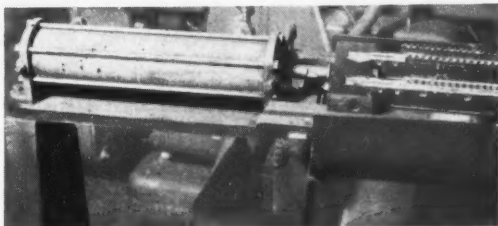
This Hopkins air cylinder is used to pull the broaches back to the extreme limit of the machine.
